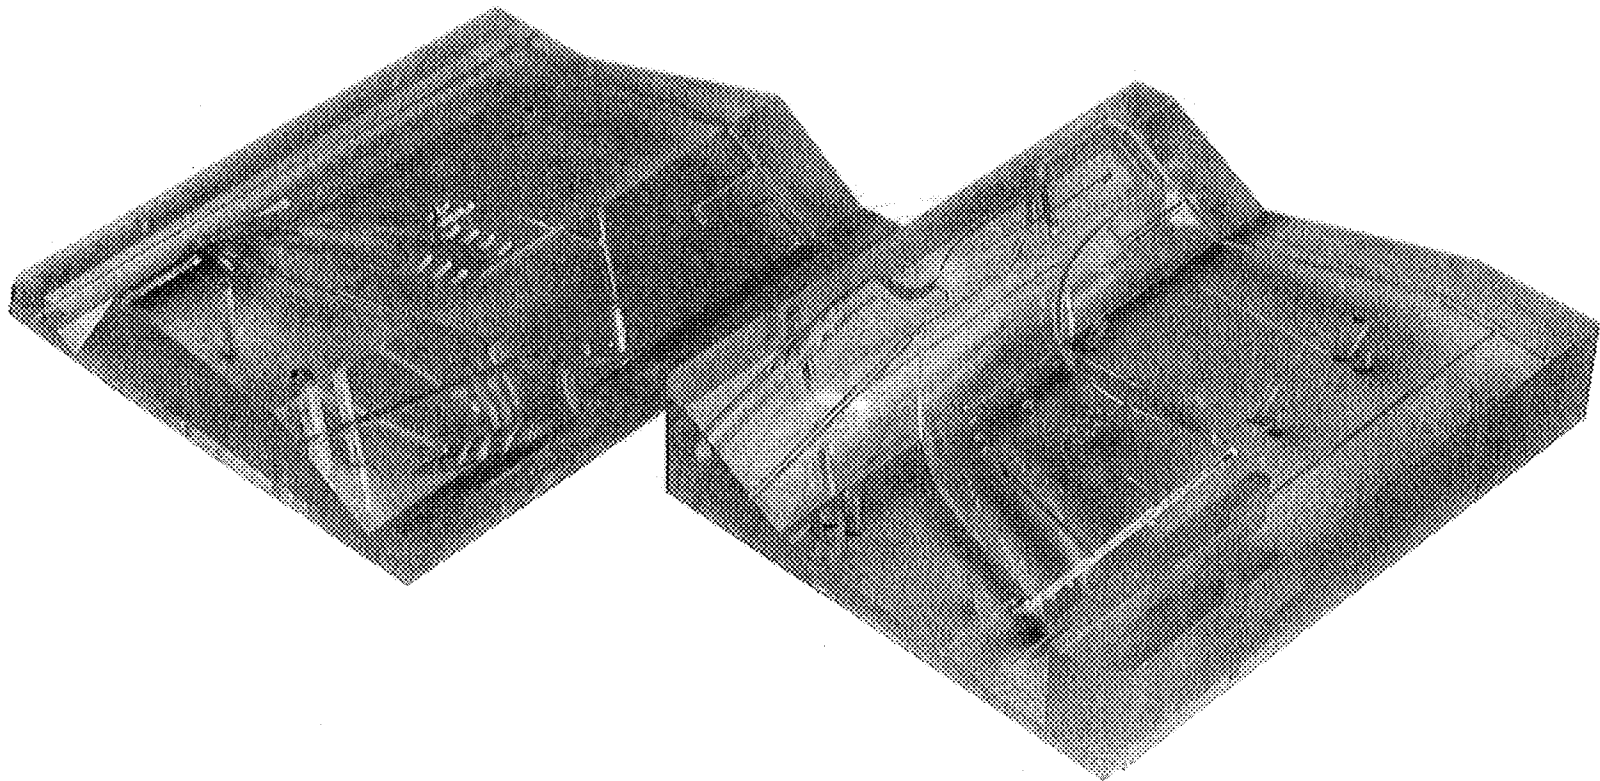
Photograph of Leading and Trailing Surfaces of Coolant Passage Before Assembly.
